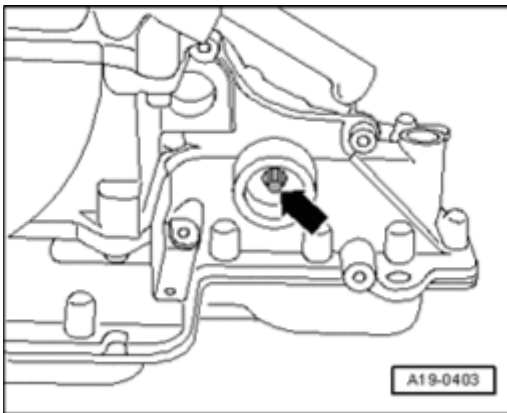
Removing/Installing Drive Shaft For Coolant Pump From Oil Pump
